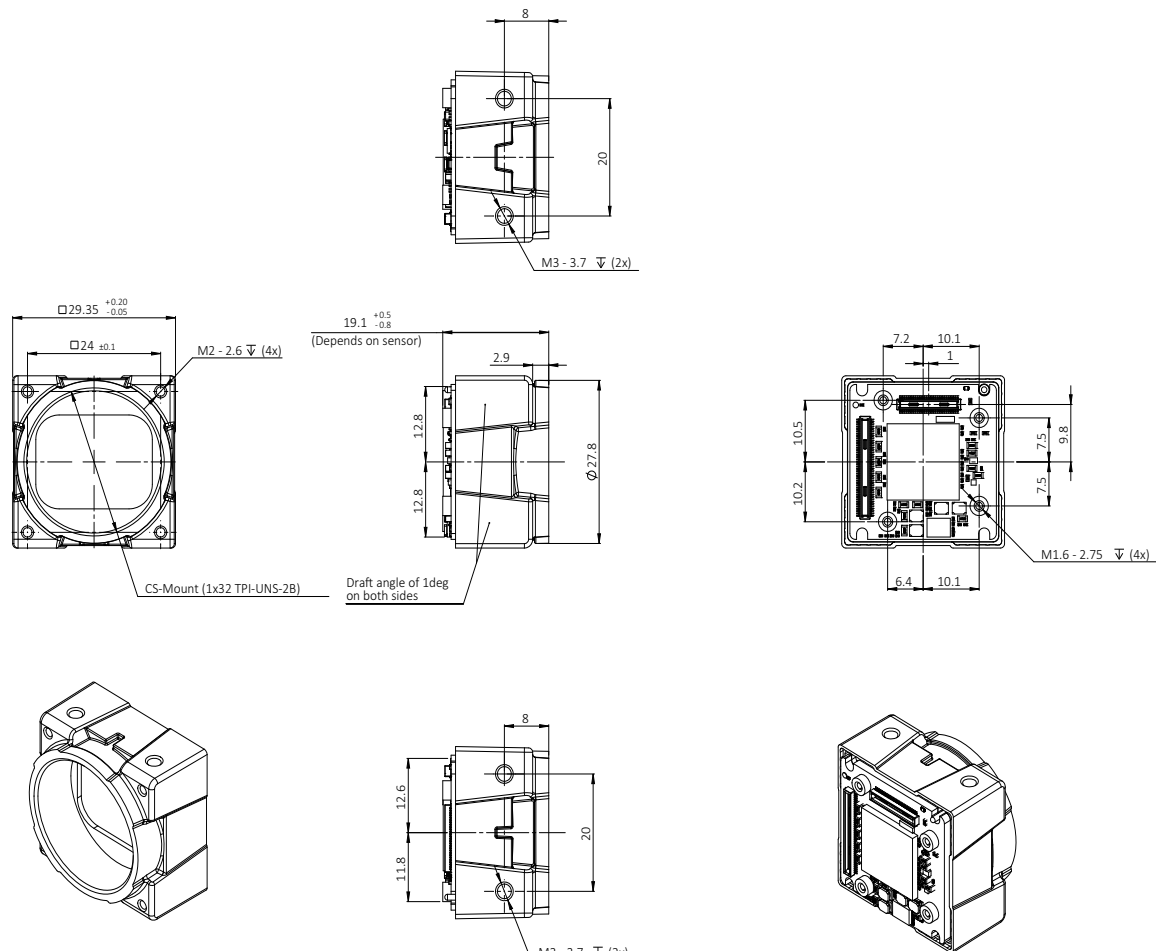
Open Housing CS-Mount (Alvium Flex) dimensions
